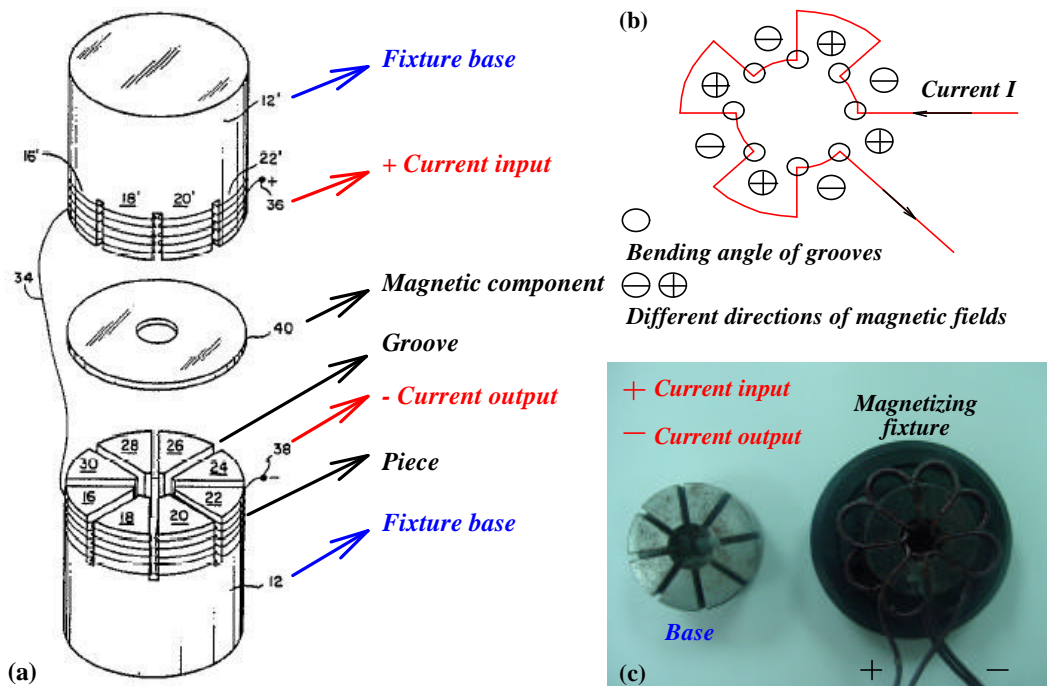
(a) Schematic view of the magnetizing fixture in the axial direction. (b) Configuration of the winding pattern in the magnetizing fixture. (c) Photos of the fixture base and magnetizing fixture.
